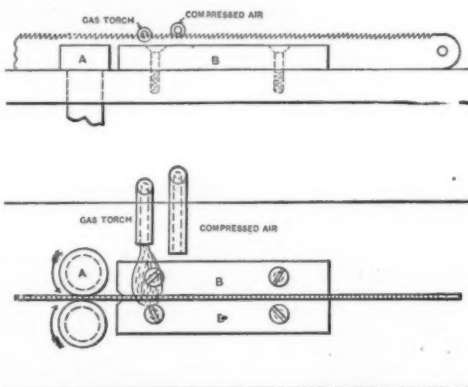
METHOD OF HARDENING FLEXIBLE HACK-SAW BLADES.
